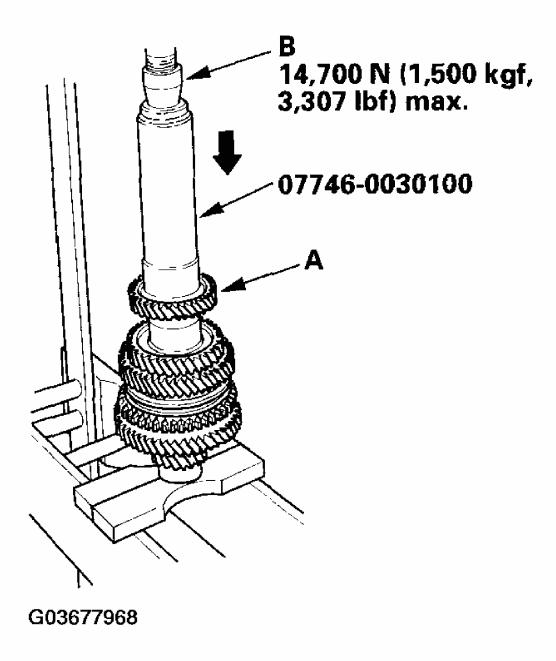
Installing Fourth Gear Courtesy of AMERICAN HONDA MOTOR CO., INC.
